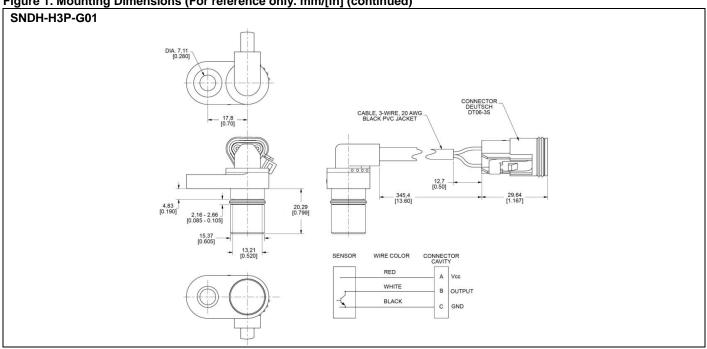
Mounting Dimensions (For reference only. mm/[in] (continued)
